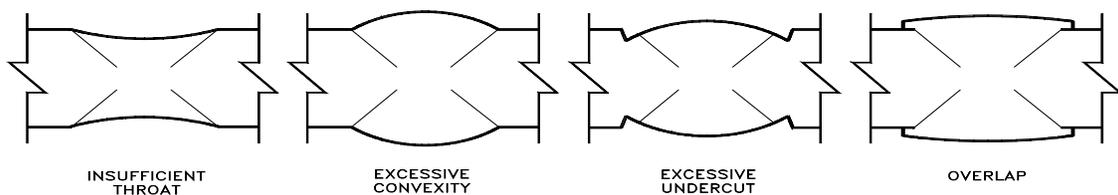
Unacceptable Groove Weld Profiles
